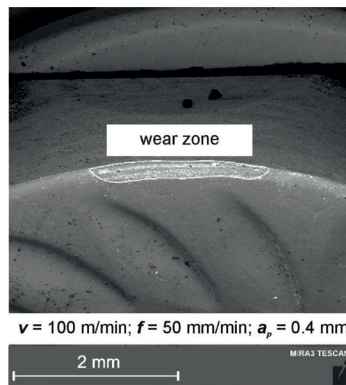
, *a* shows the condition of the rake and flank surfaces of the cutting plate, as well as the radius cutting edge, after a short milling without visible wear. The chamfer on the cutting edge, obtained during the manufacture of the indexable insert, is clearly visible in the photo. After longer milling with a milling depth of $a_p = 0.4$ mm, a wear zone appears on the chamfer of the flank surface, but it also captures a small area of the rake surface adjacent to the cutting edge.
